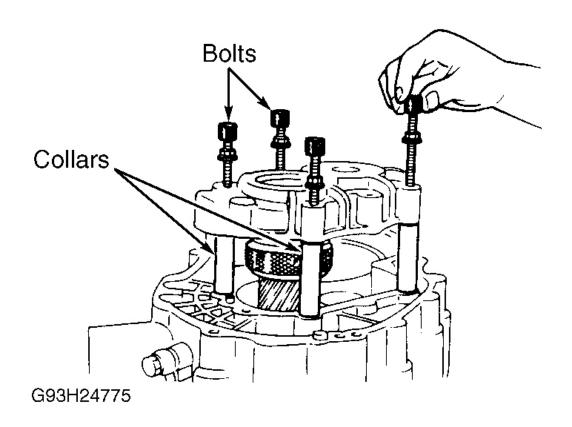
Installing Selector Gauge On Output Gear Assembly Courtesy of MAZDA MOTORS CORP.
